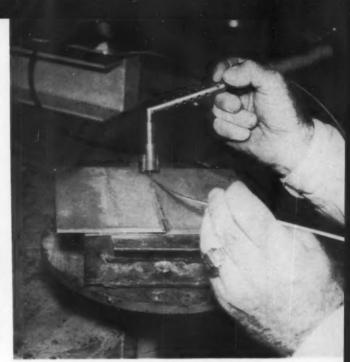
FIG. I—Fusion welding setup for welding zirconium uses an inertshielded - gas - arc tech nique.
